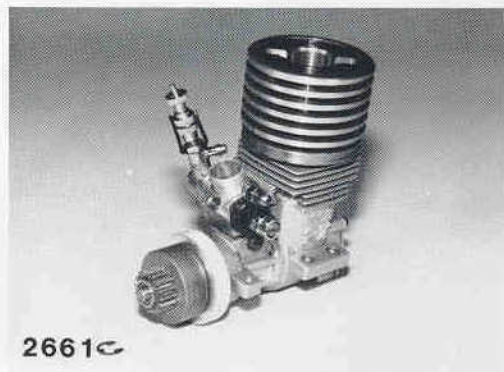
& 260 Take out the #7606 16 tooth 32 pitch clutch bell and the two #6902 3/16" x 5/16" flanged ball bearings or the two #6863 3/16" x 5/16" flanged bushings from the clutch bag. Install one bearing or bushing into each side of the pinion gear hole. The bearings or bushings should install with only finger pressure; if not, sand the inside of the edge of the hole to remove any possible burrs until you can push them in. Now slide the clutch bell assembly onto the clutch nut as shown. In the clutch bag you will find the #2661 clutch nut E-clip. This will slide into the groove in the end of the clutch nut to hold the clutch assembly in place. We will now set the engine aside for a few steps. Note: the following figures will show the installation of a Yokomo non-pull start engine for photo clarity; a pull start engine will install the same way.
